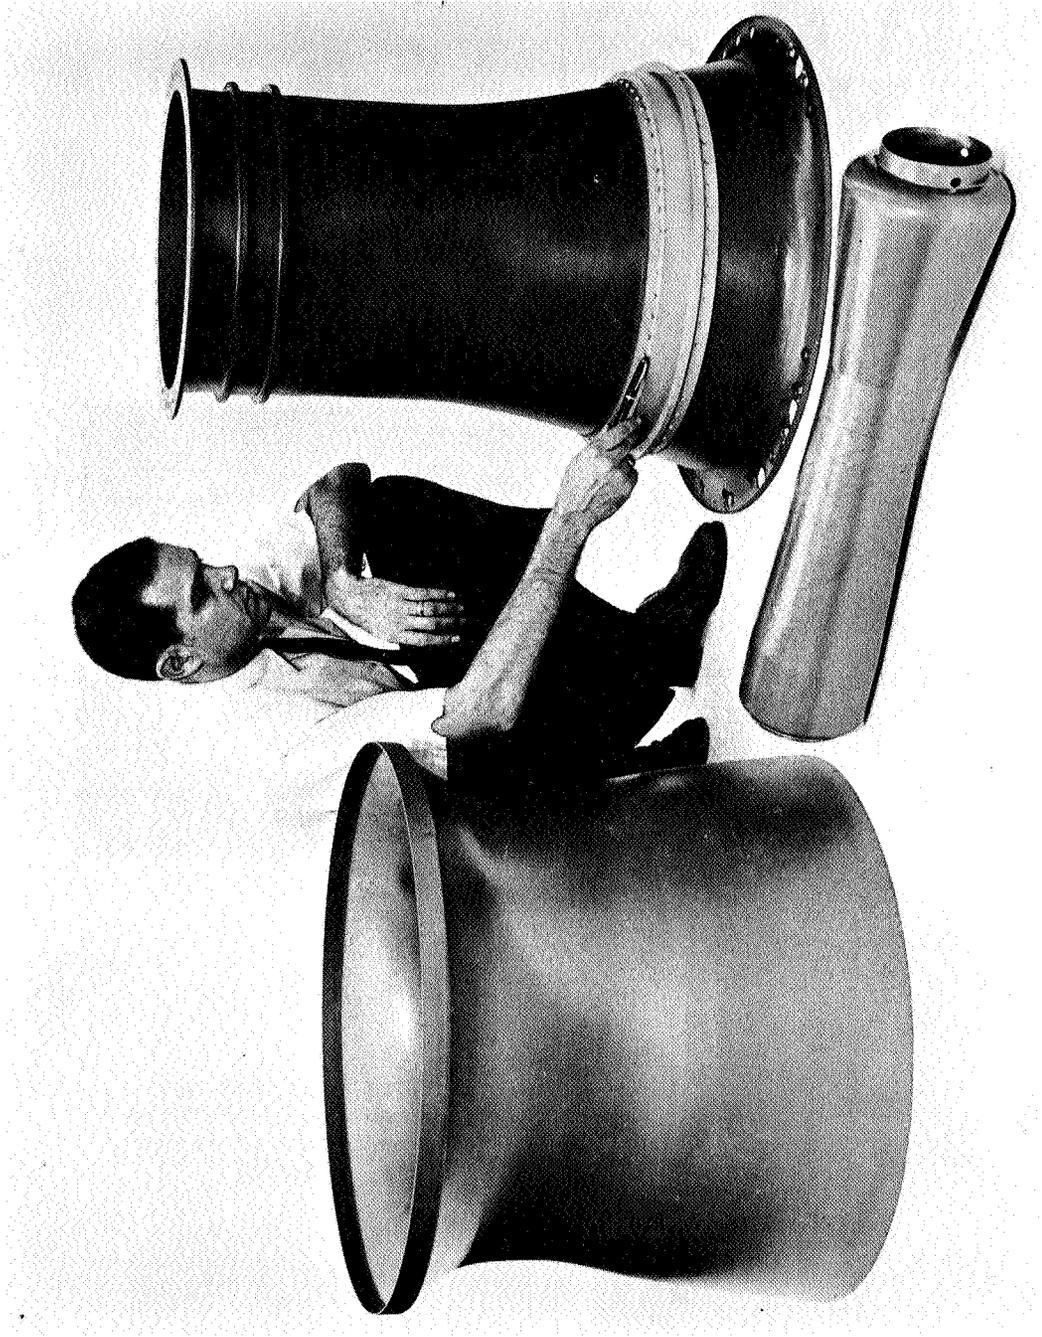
SHEAR-FORMED TYPE 321 STAINLESS STEEL PARTS
